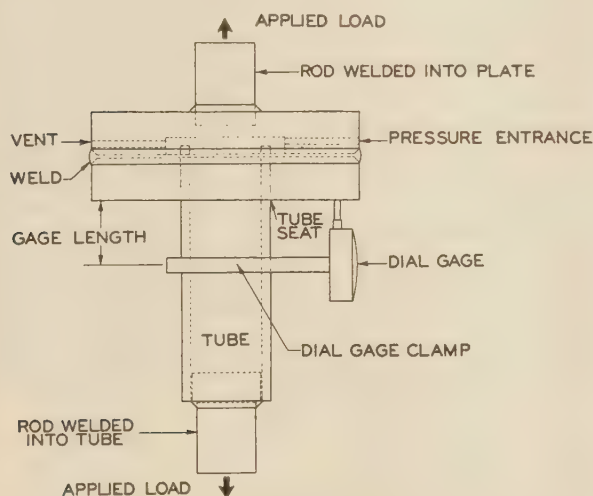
SKETCH OF TENSION-TEST SPECIMEN SHOWING POSITION OF DIAL GAGE
